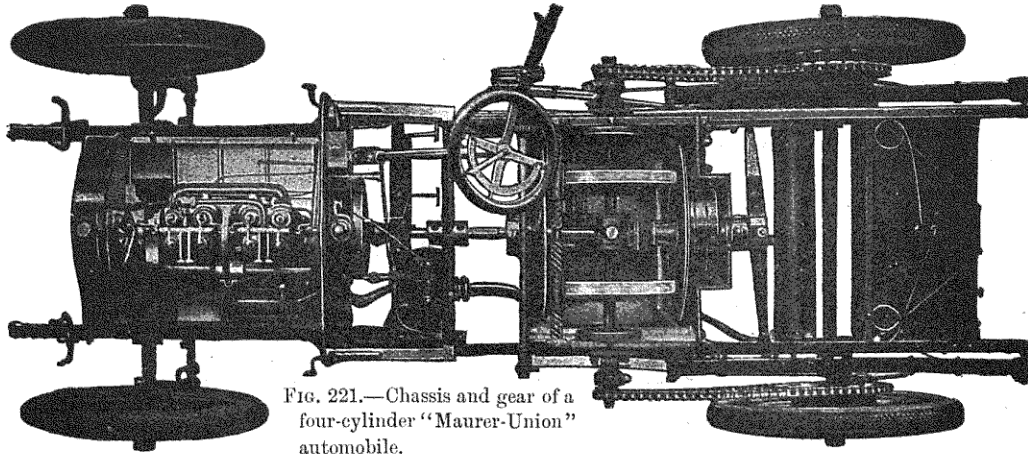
Chassis and gear of a four-cylinder "Maurer-Union" automobile.
